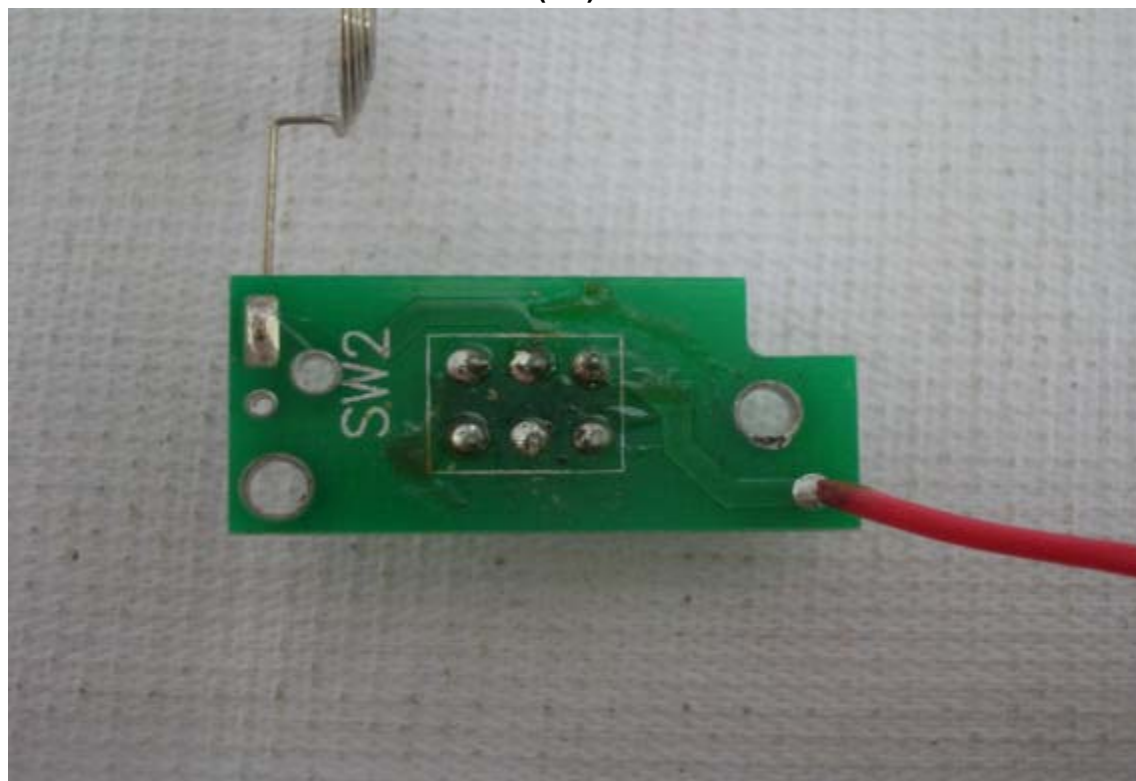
EUT (TX) COMPONENT SIDE VIEW
